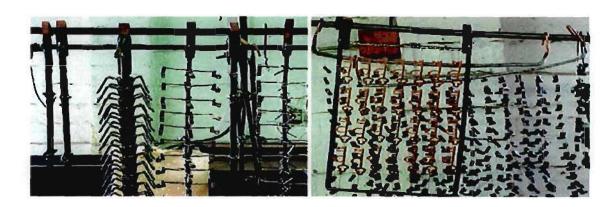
Different types of jigs used during cleaning and plating of workpieces
